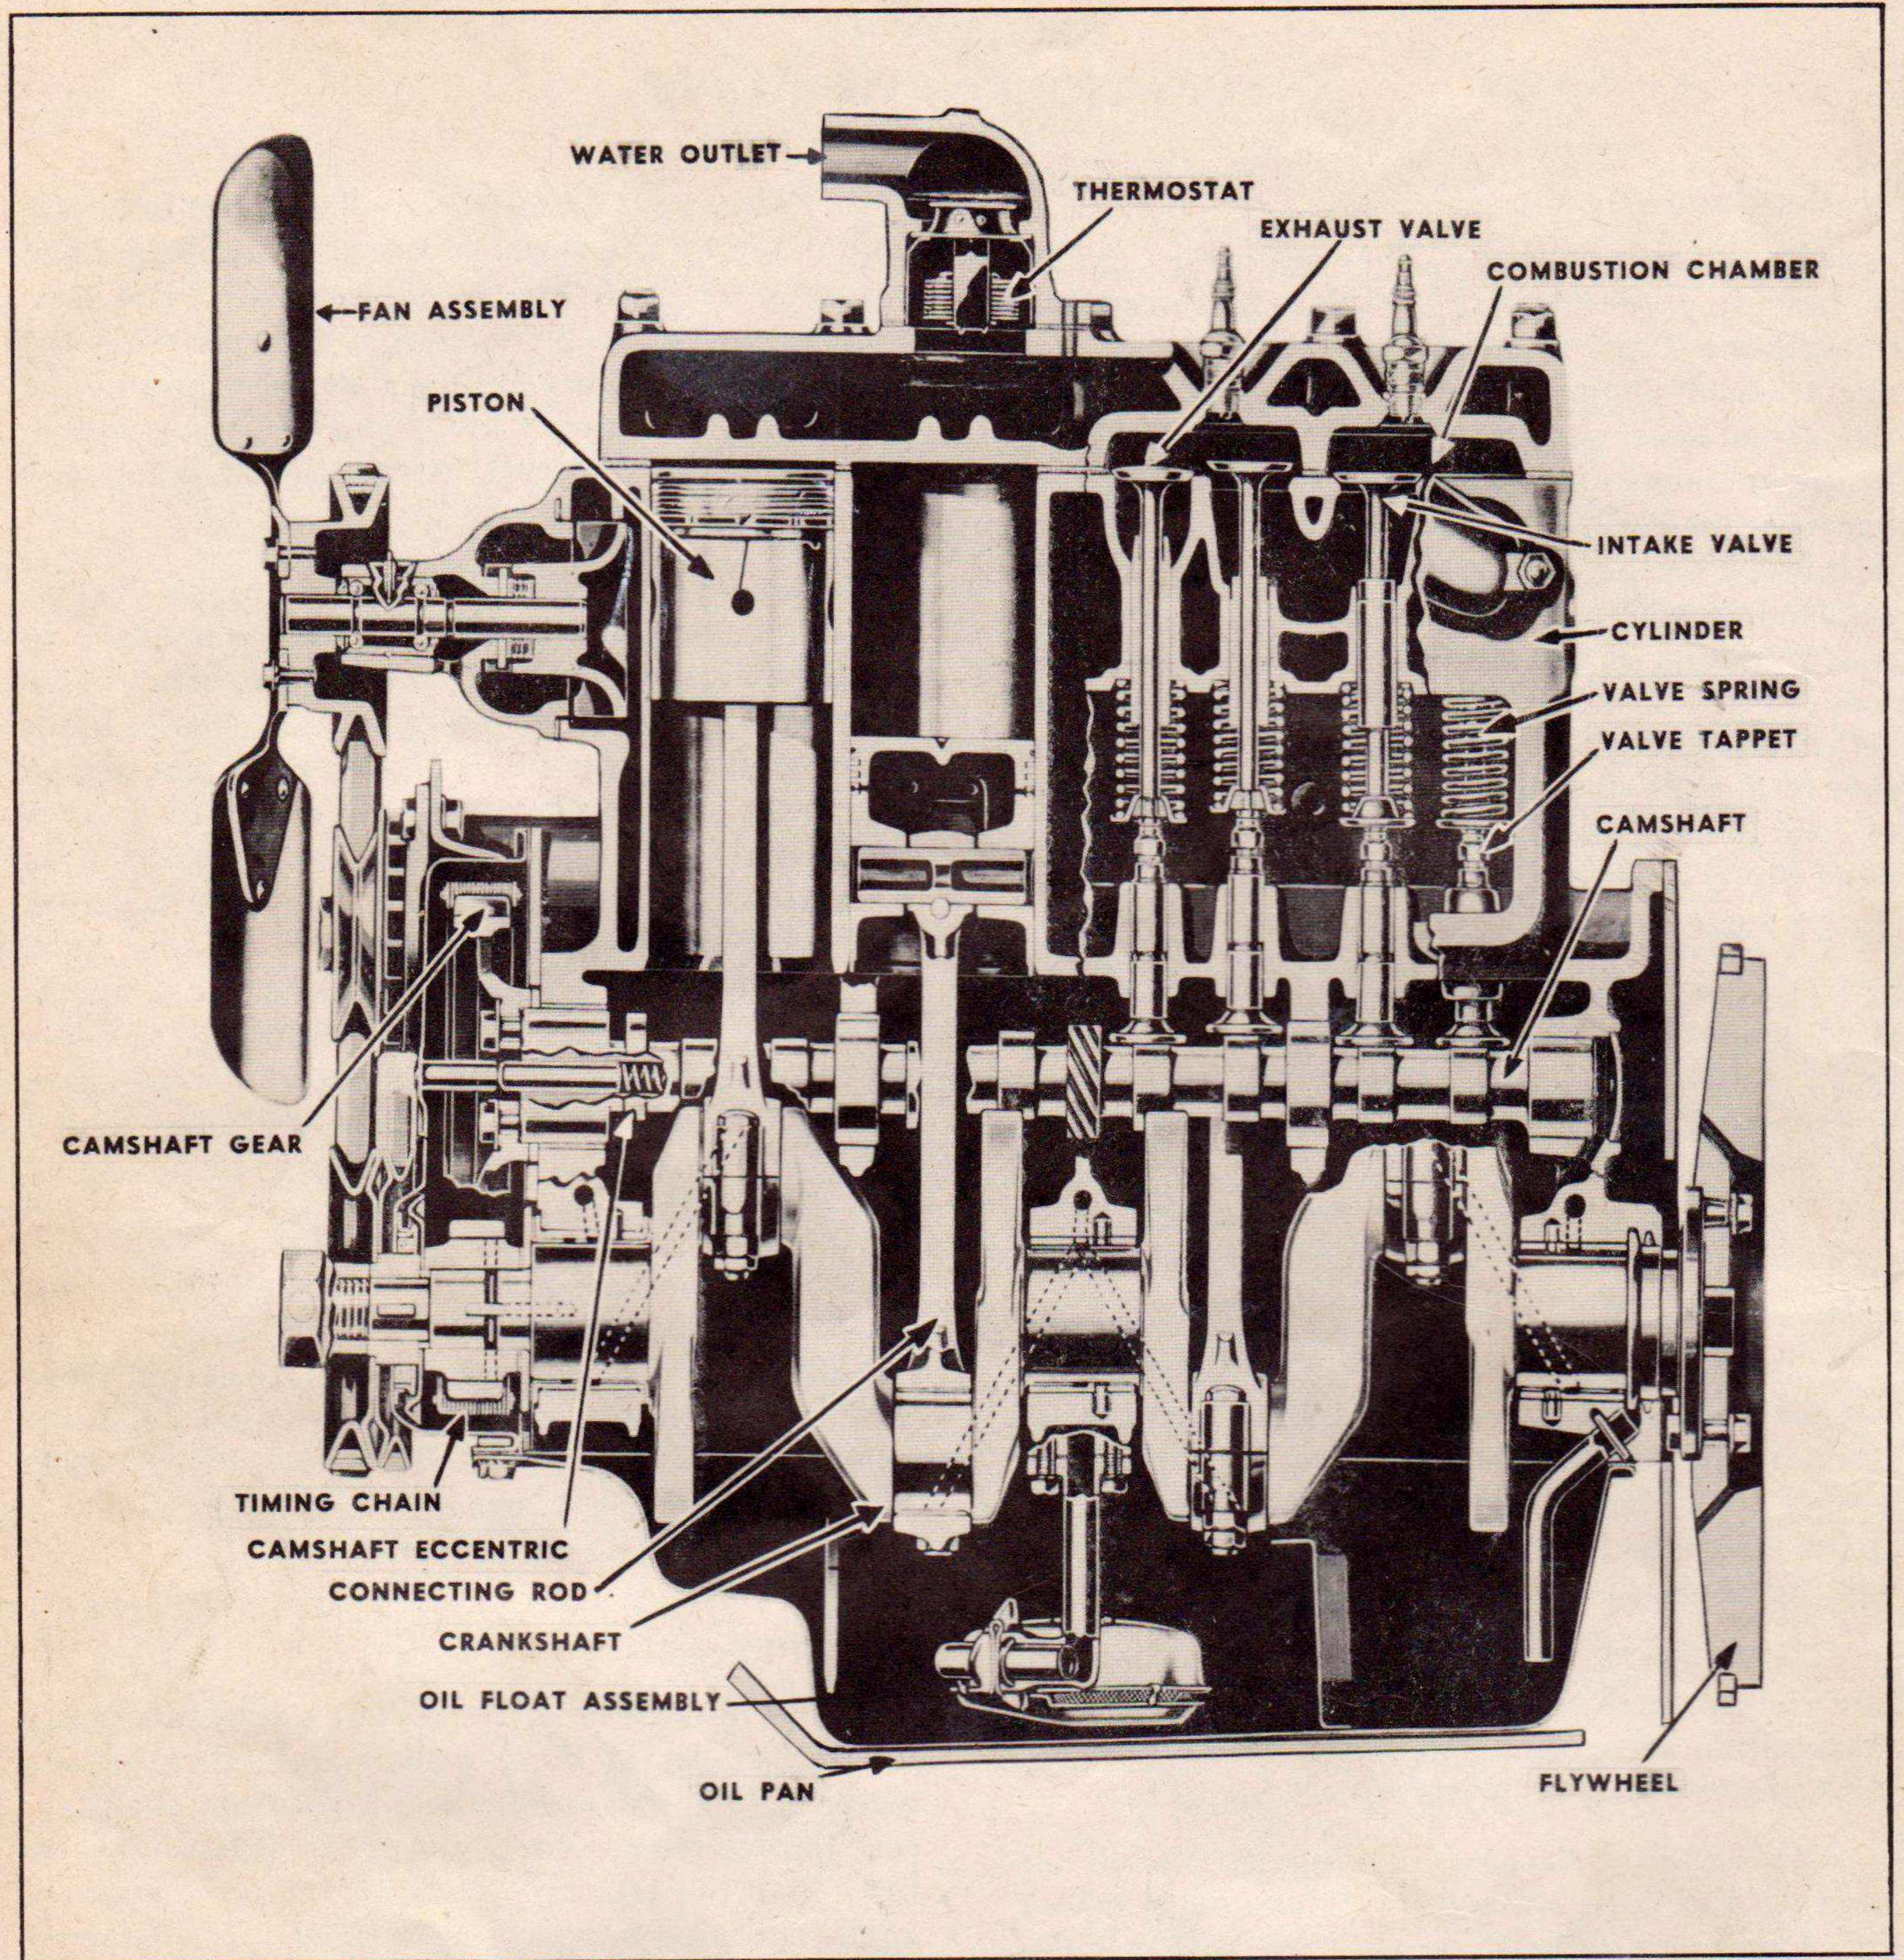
SIDE SECTIONAL VIEW OF ENGINE
